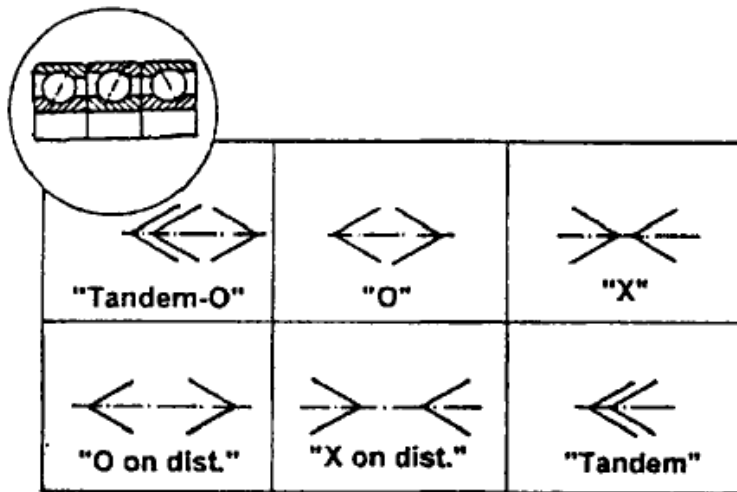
Variants of the front-end bearing arrangements of the spindle assembly
